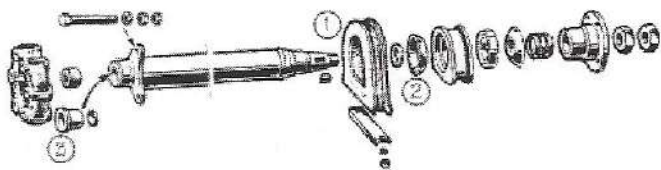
Pre '69 105 style driveshaft support bearing. The metal ring that surrounds this piece must be air-chiseled out for this upgrade.
